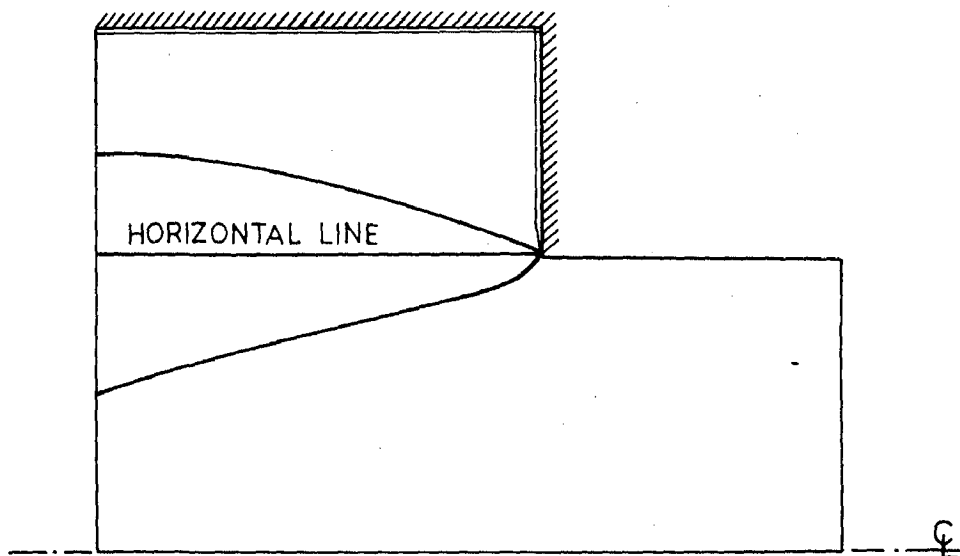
POSSIBLE POSITIONS OF ACTUAL EXTRUSION PRESSURE CONTOUR IN THE CONTAINER.
